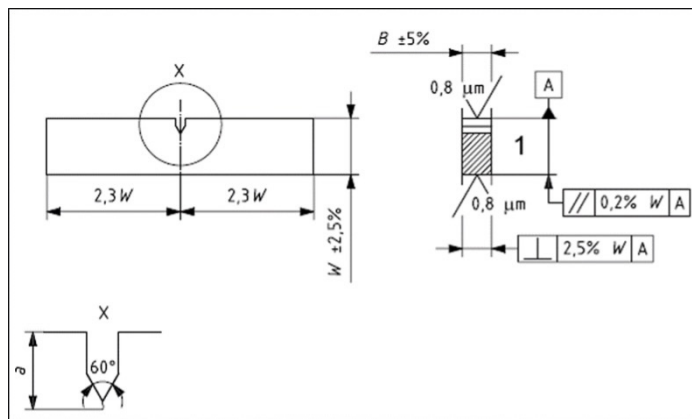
Dimension and tolerances of CTOD specimen, test<sup>12</sup>.
